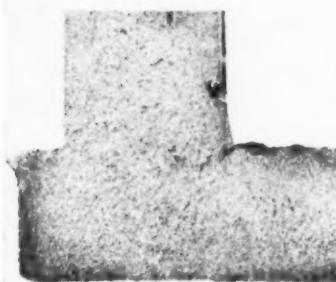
Section of casting showing tear induced by test block bonded with 7.5 pct fireclay.
